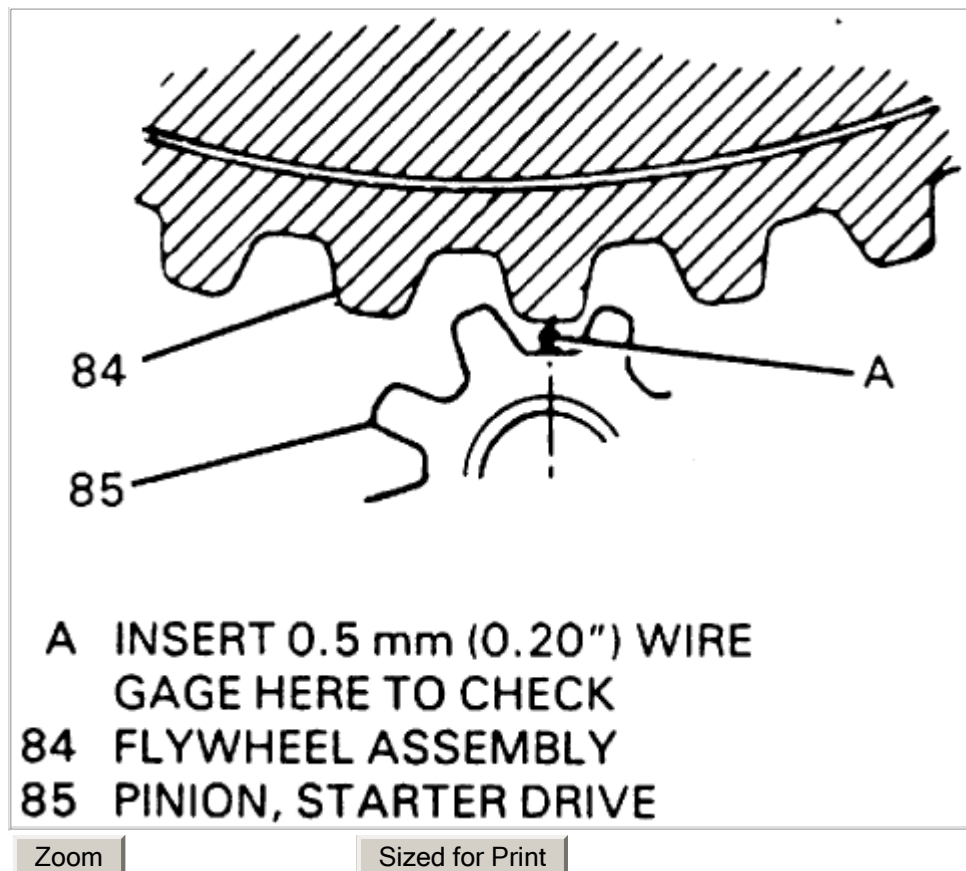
Flywheel Assembly To Pinion Clearance Inspection
